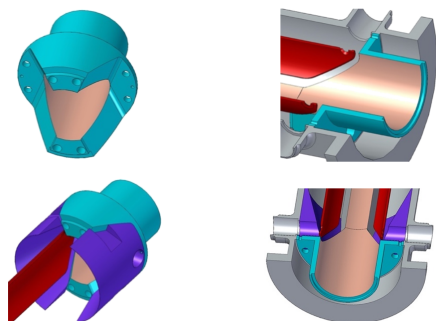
Detailed view of the end design: the end cap (top left); placement of the end cap and the electrodes with the chamber rib (top right); adding back tapers (bottom left); complete end design (bottom right).
